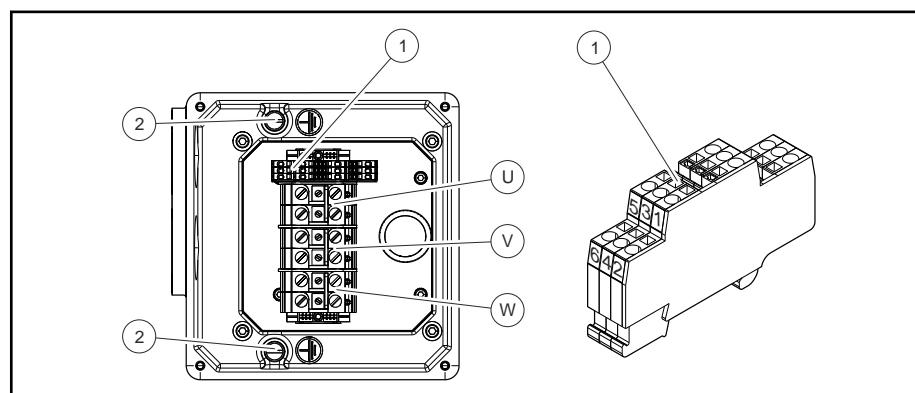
Tightening torque for screws in Nm within the terminal boxes
